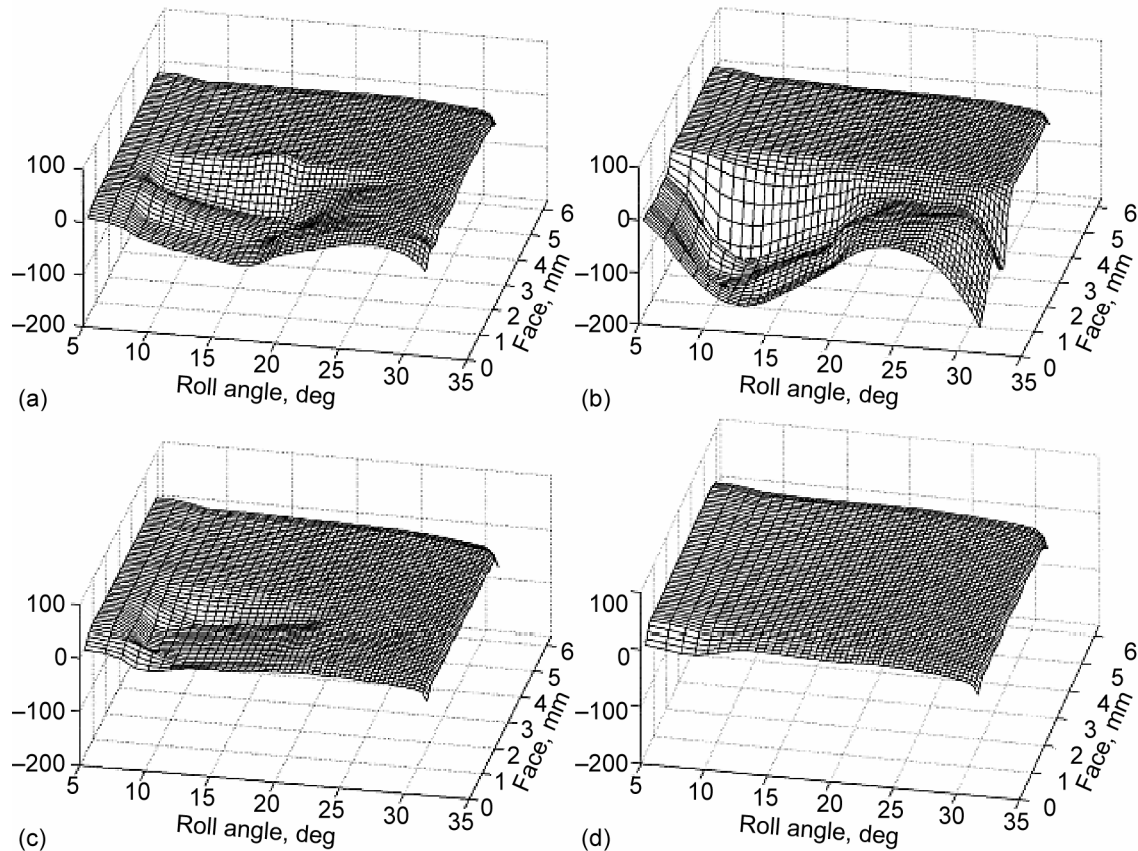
High-resolution 3D CMM inspections showing deviation surface profiles from perfect involute, units of  $\mu\text{m}$ , for (a) tooth 6, (b) tooth 12, (c) tooth 19 and (d) tooth 26 of the same gear shown in Fig. 10.
